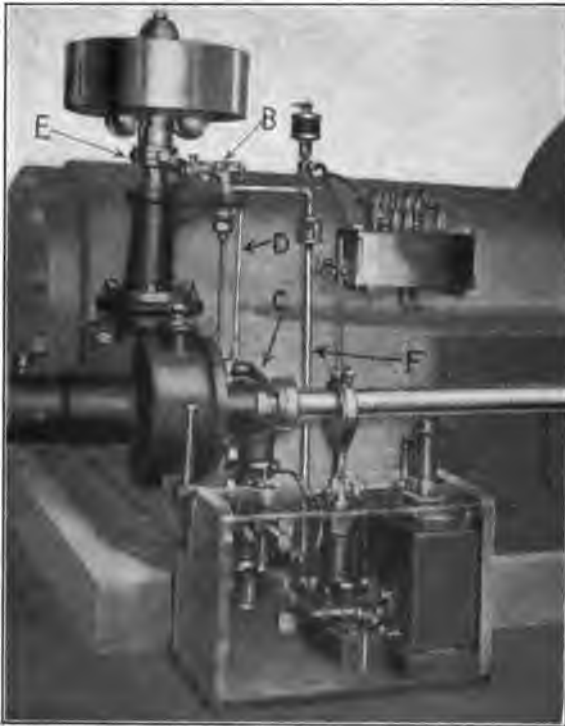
De La Vergne type D.H. oil engine governor and fuel pump.
